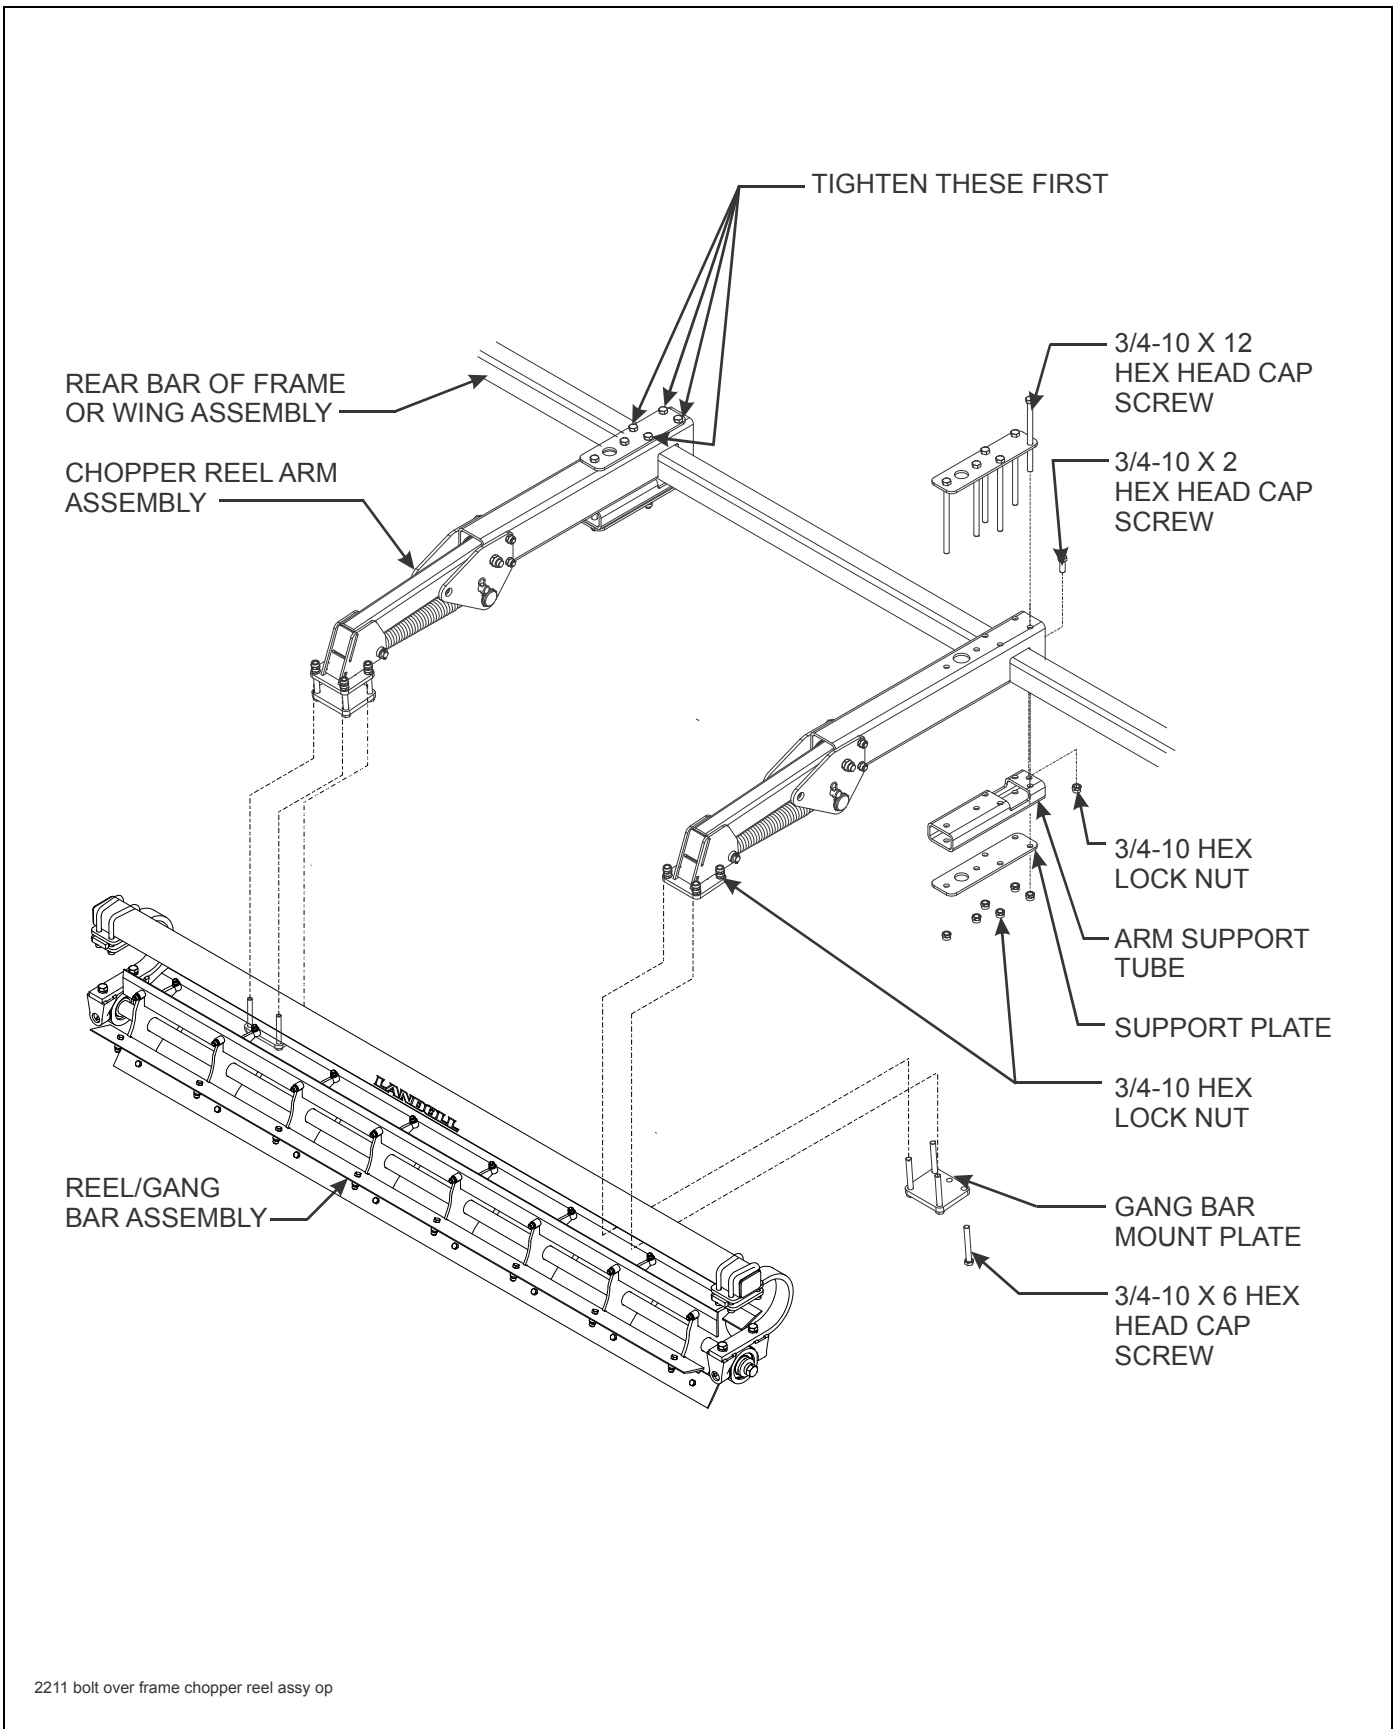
Standard or Hydraulic Tubular Mount Chopper Reel Installation (Option)
